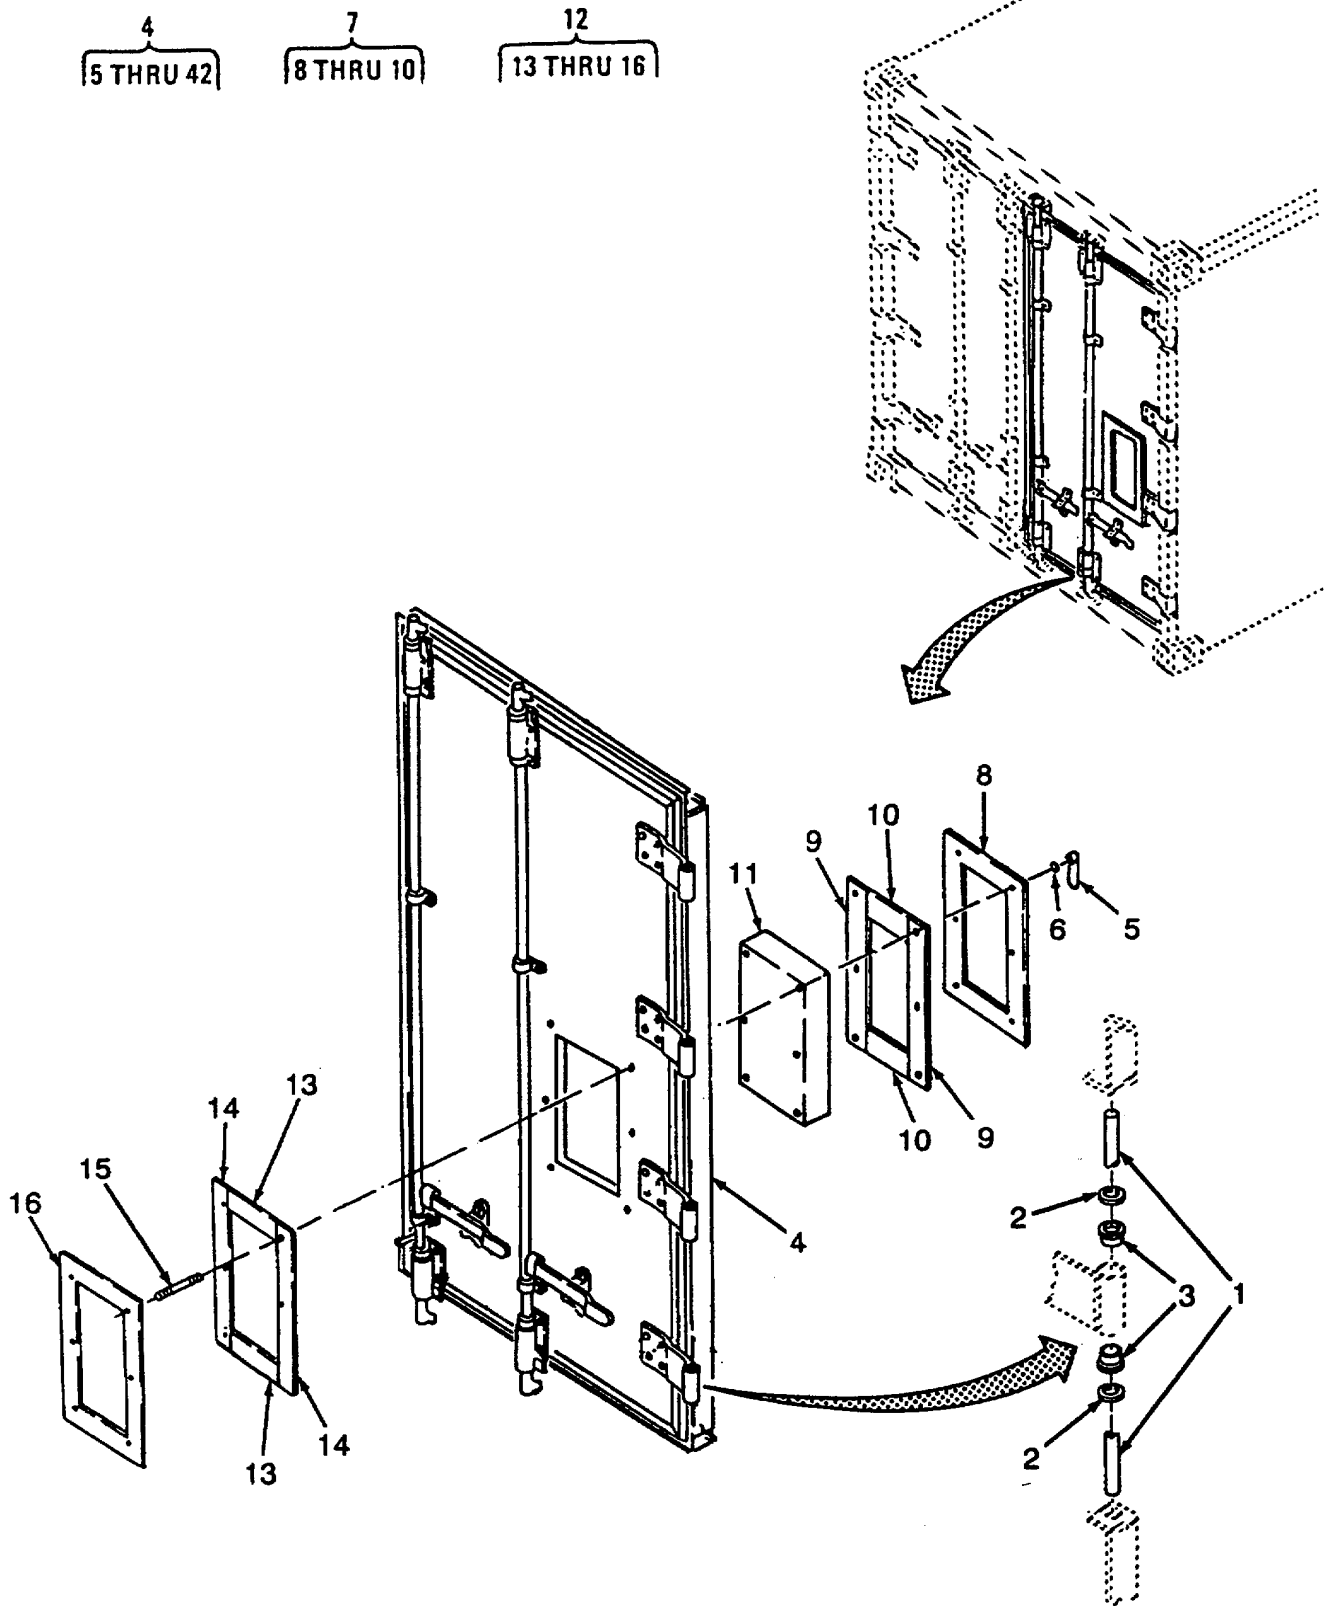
Right Hand Door Assembly(Sheet 1 of 2)
